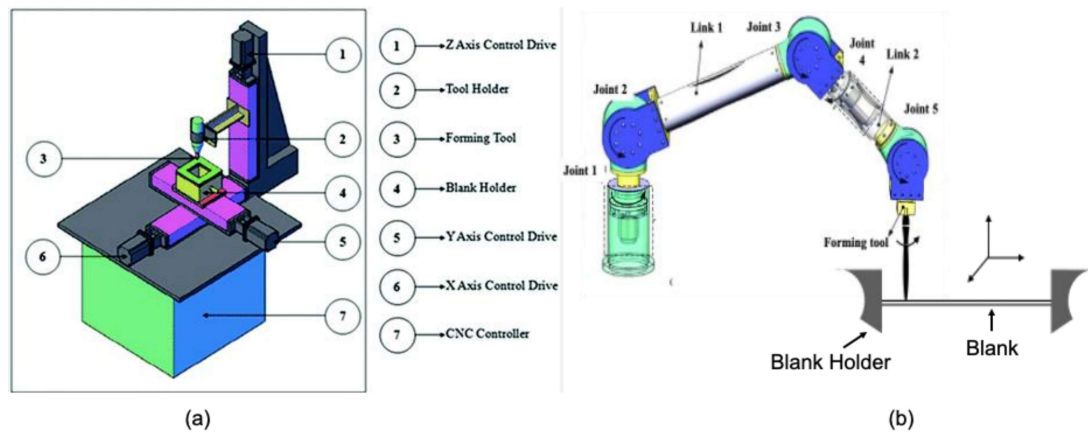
(a) CNC machine-based ISF machine [22](b) Robotic arm-based ISF machine.
